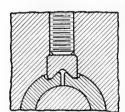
Here the shoe clamps the ring about the shaft. It is made in key form, i.e., a slot is cut in the external member to accommodate the shoe. The V in the shoe should be 90 deg.
